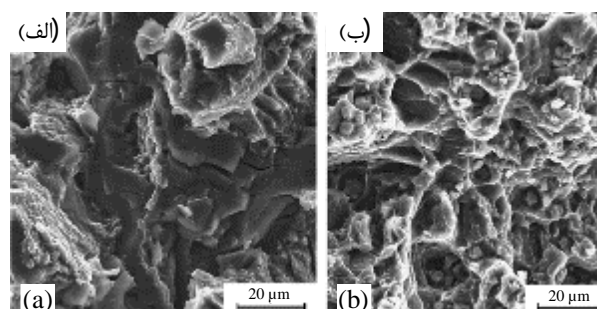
Tensile fracture surfaces of AZ91 tubes (a) as-cast and (b) RTES processed [79].
